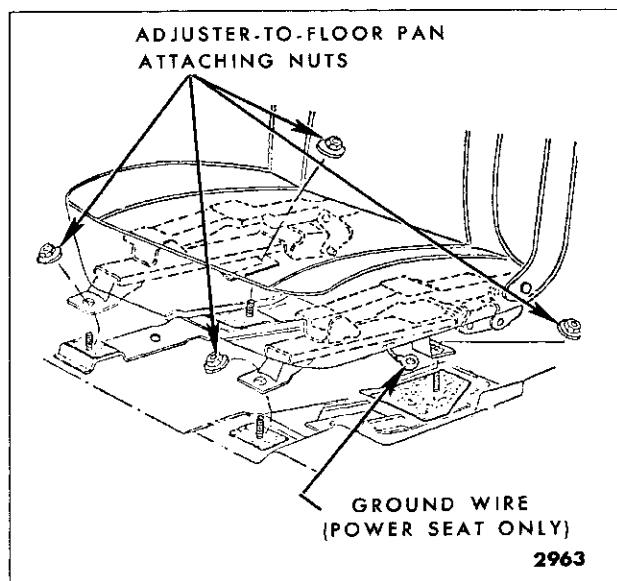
Bucket Seat Floor Pan Attachment - "A, F, X & Z" Styles
